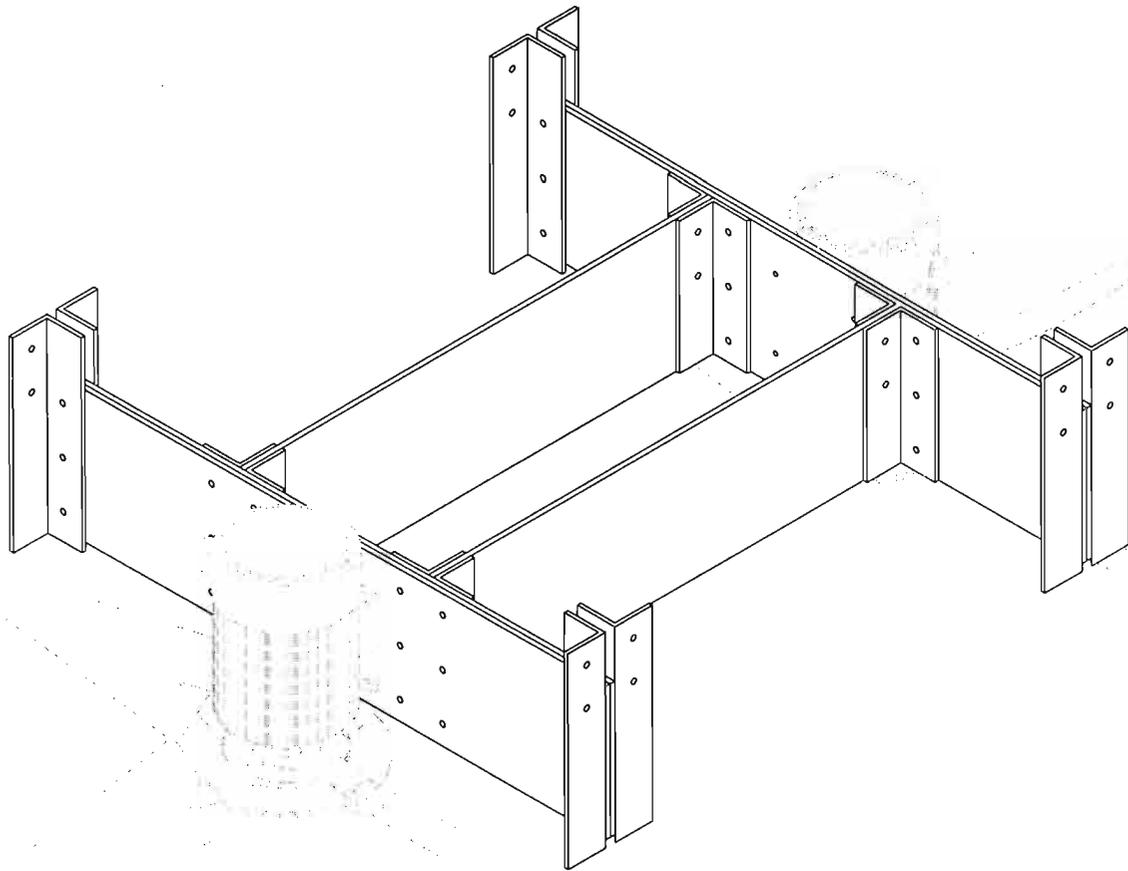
Fan-Motor Gusset Support Structure
